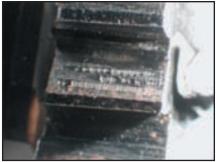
Gear tooth surface, post-shaping (Ref. 3).
